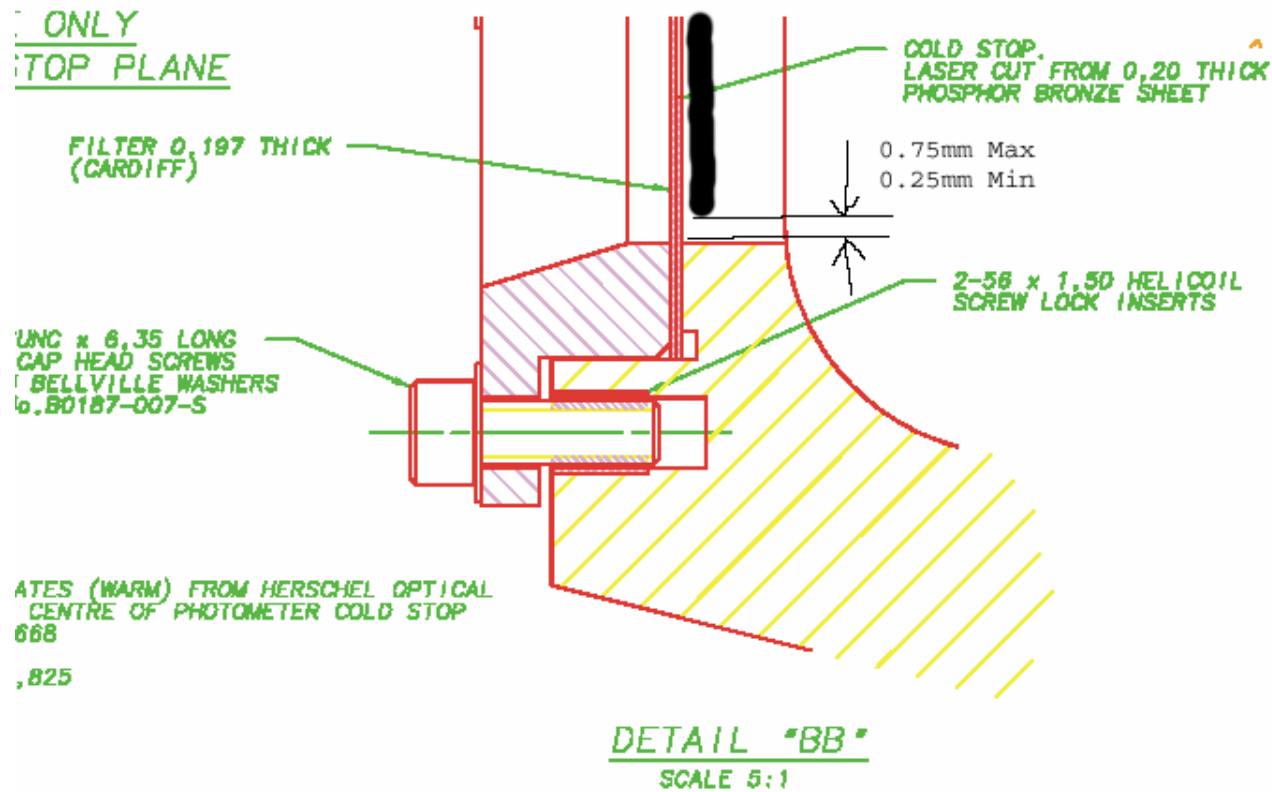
View of cold stop and mount from inside the Photometer Detector box detailing the surface to be coated with optical black.
